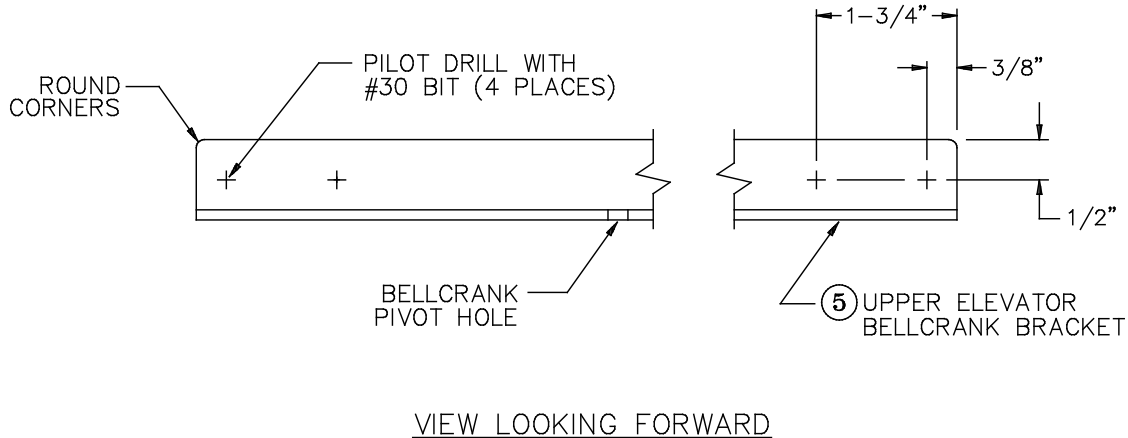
Marking Hole Locations on the Upper Elevator Bellcrank Bracket
